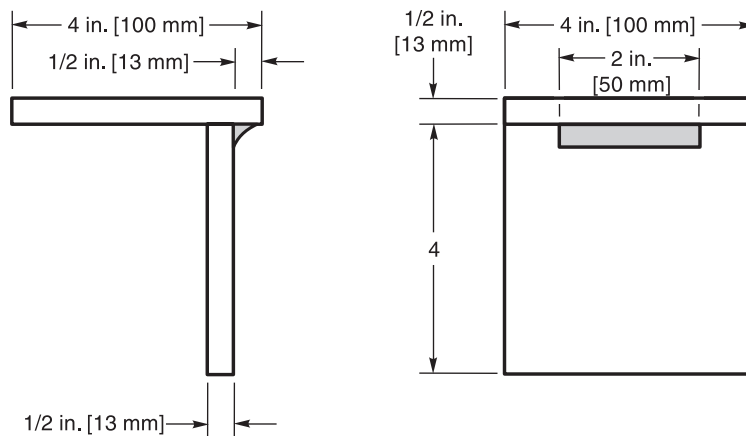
Fillet Weld Break Specimen—Tack Welder Qualification
